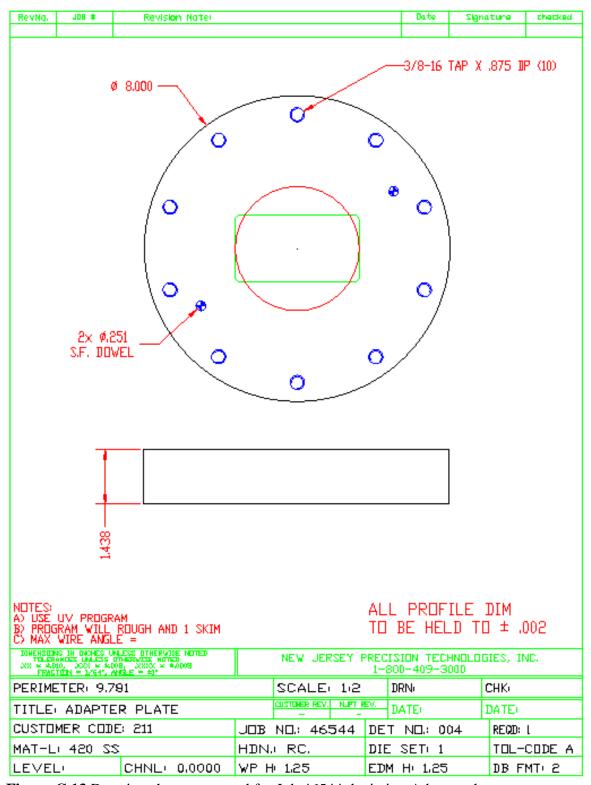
Drawing sheet generated for Job 46544 depicting Adapter plate.
